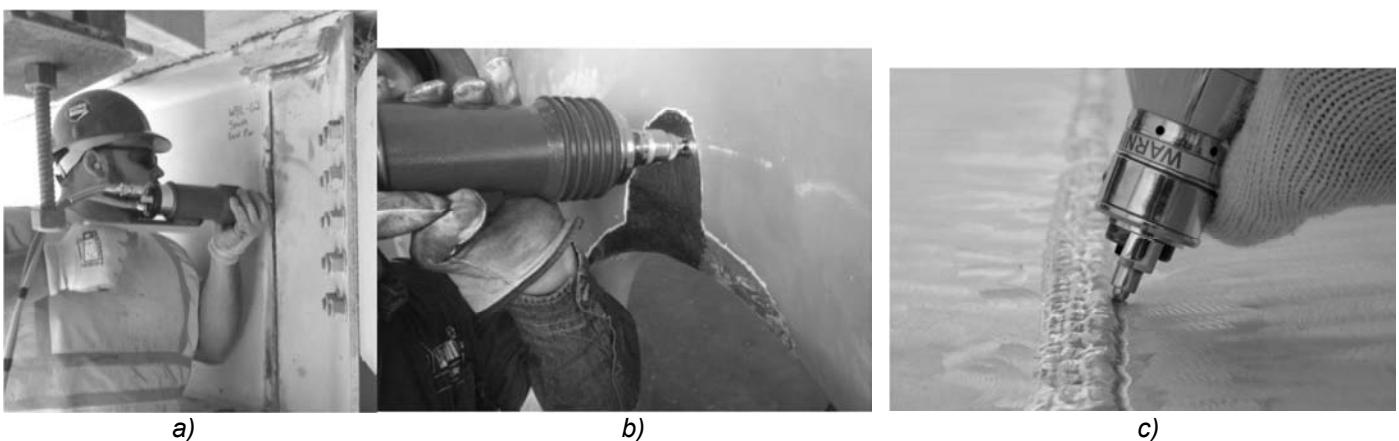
Industrial application of UIT/UP: a) fatigue improvement of welded elements of a highway bridge, b) final stage of fatigue crack repair in heavy mining equipment and c) for prevention of fatigue and corrosion cracking of large aluminium welded panels
